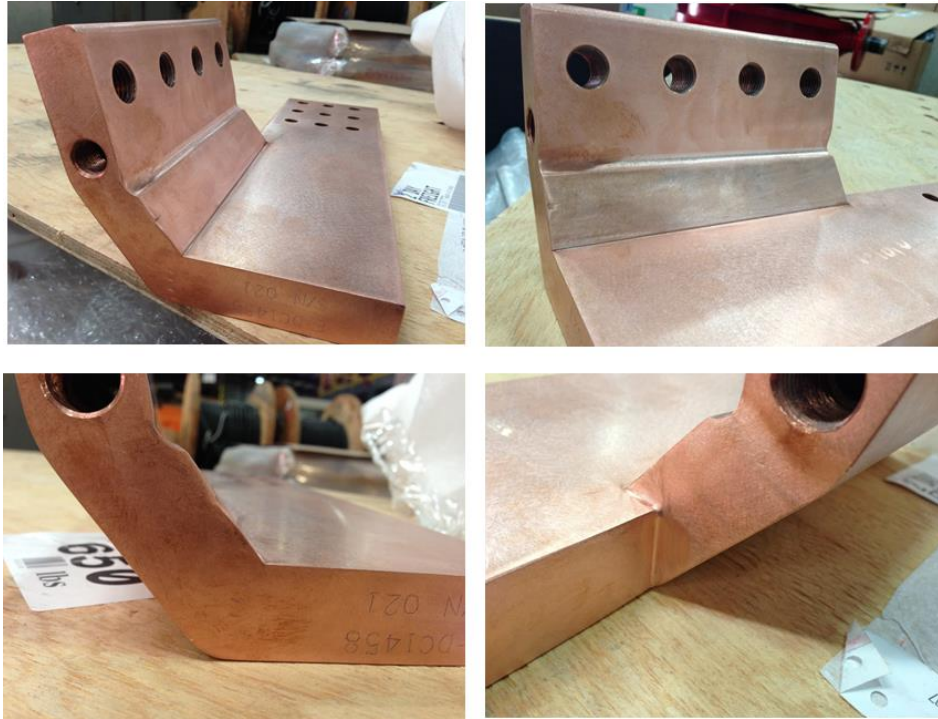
3 Type “C” Before Weld Clean-Up
